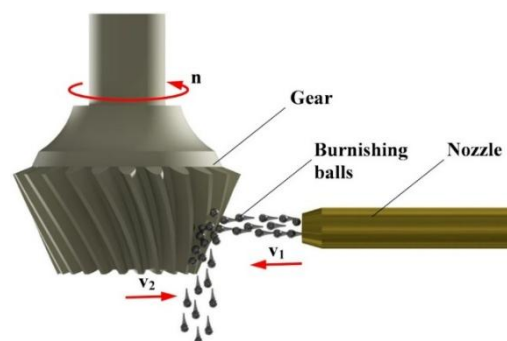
Device for burnishing the working surfaces of gears with arcuate teeth
